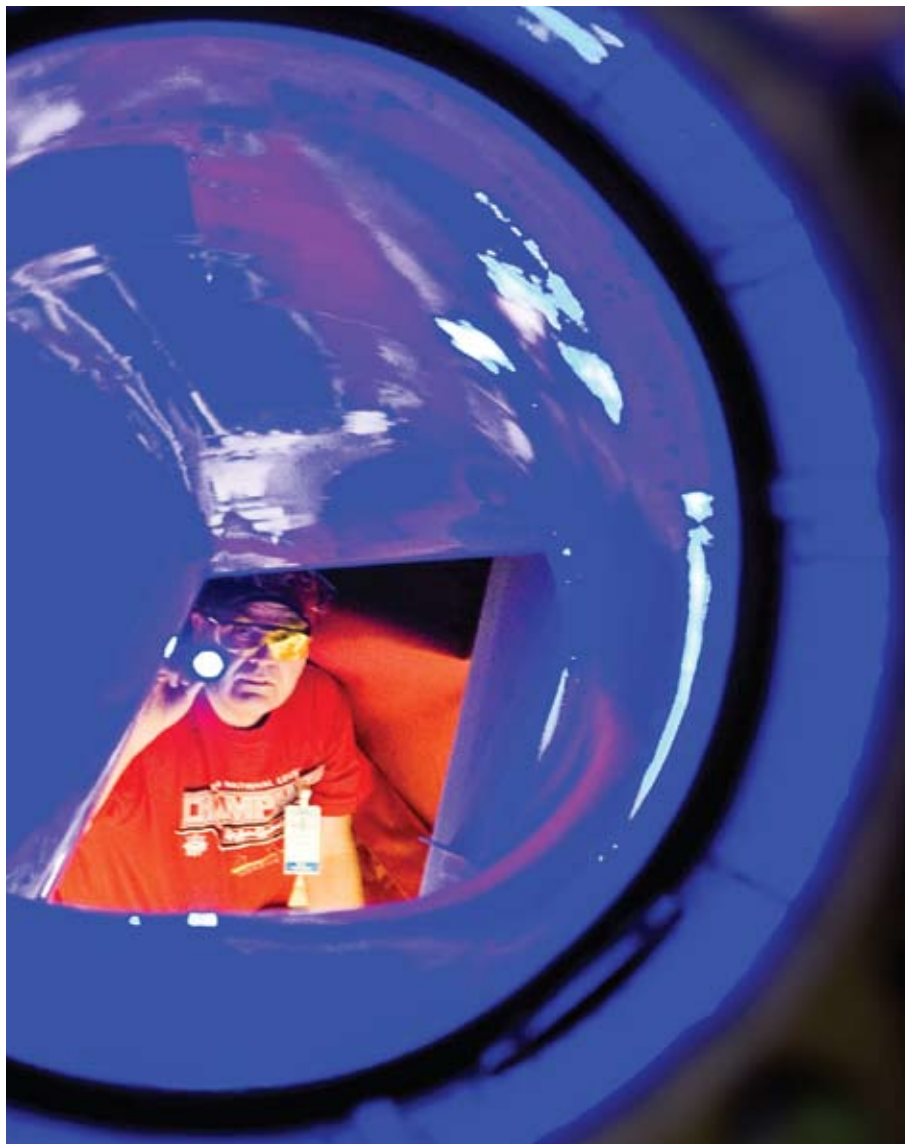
PHOTO: Daniel Wagoner, sheet-metal assembler and riveter, F/A-18 Final Assembly, uses a special “blacklight” flashlight to check for foreign object debris (FOD) during the assembly process. The flashlight is part of a larger effort to improve FOD detection and elimination. PETER GEORGE/BOEING
